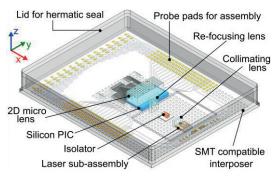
3D model of the glass interposer package proposed in Photonic LEAP [3] with through-glass vias and ball grid array (BGA) pads for board level assembly.
